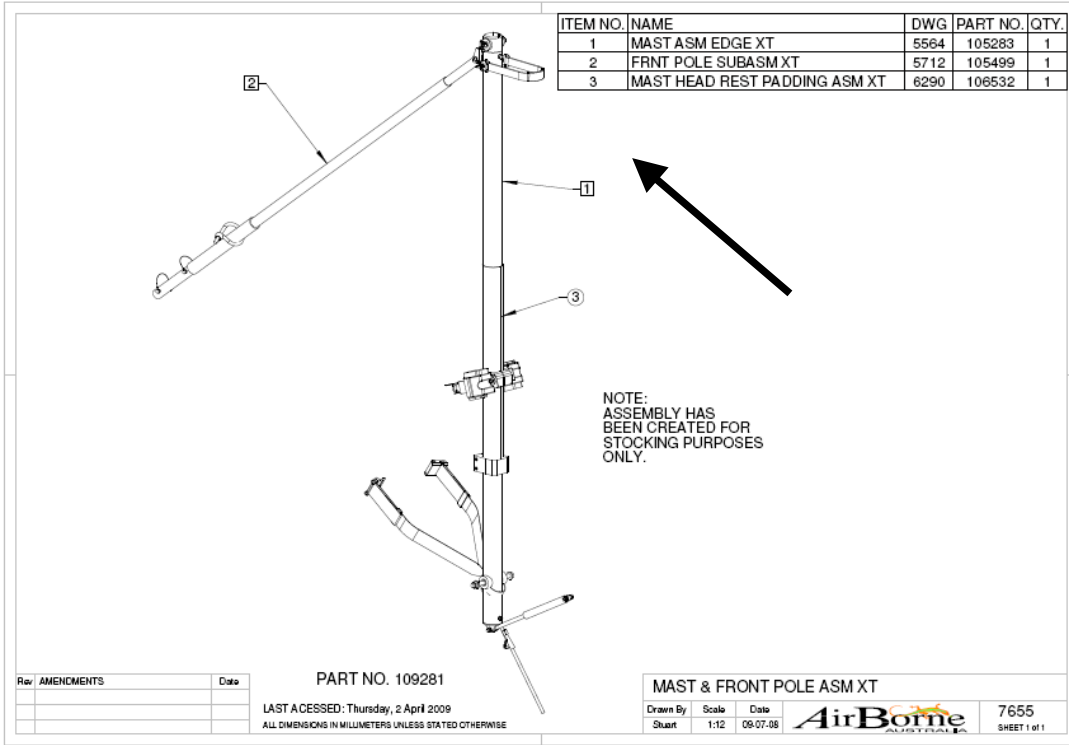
Mast & Front Pole ASM XT, Drawing # 7655
